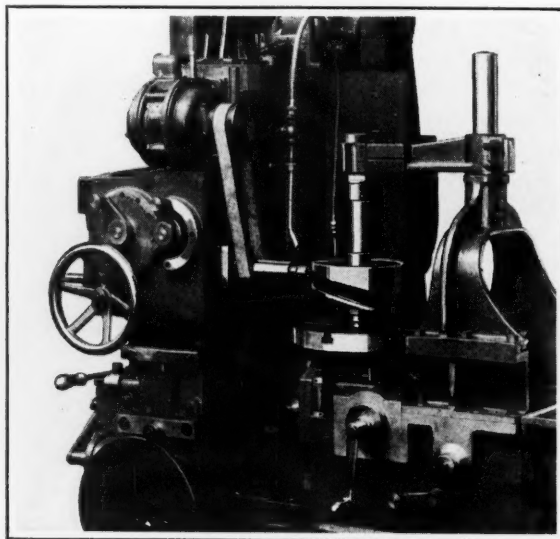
Cams can be Ground by Providing a Separate Driving Bracket, Motor, and Grinding Spindle
